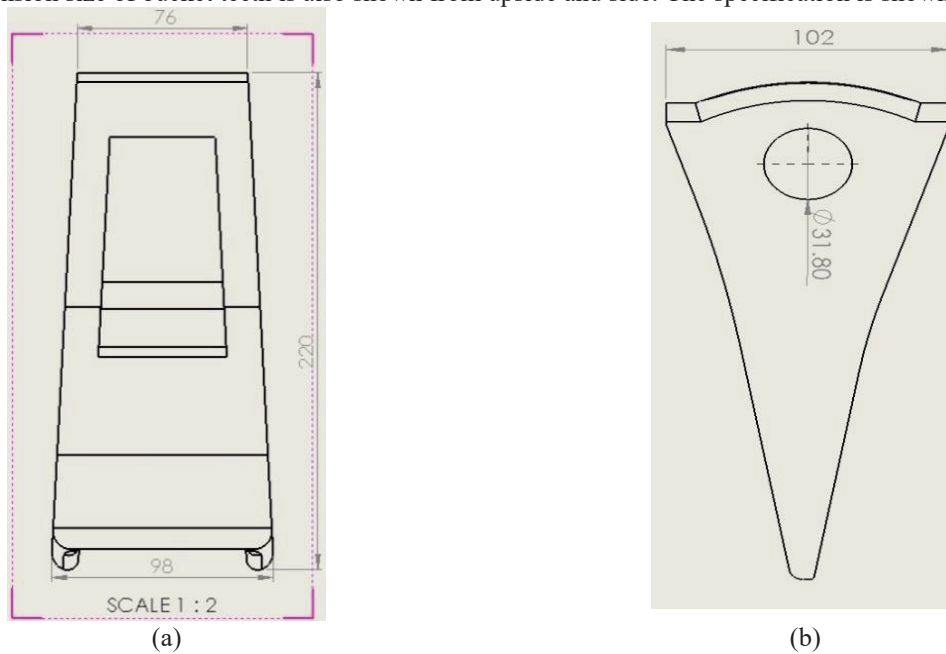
Bucket teeth dimension size (a) upside (b) side.
